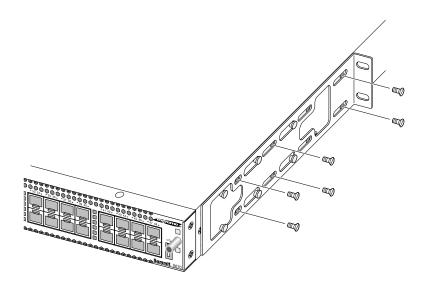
Attaching a Rack-mounting Bracket (X670 shown)
